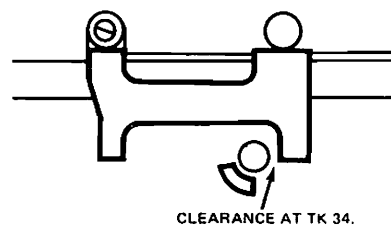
CARRIAGE LIMITER CLEARANCE
